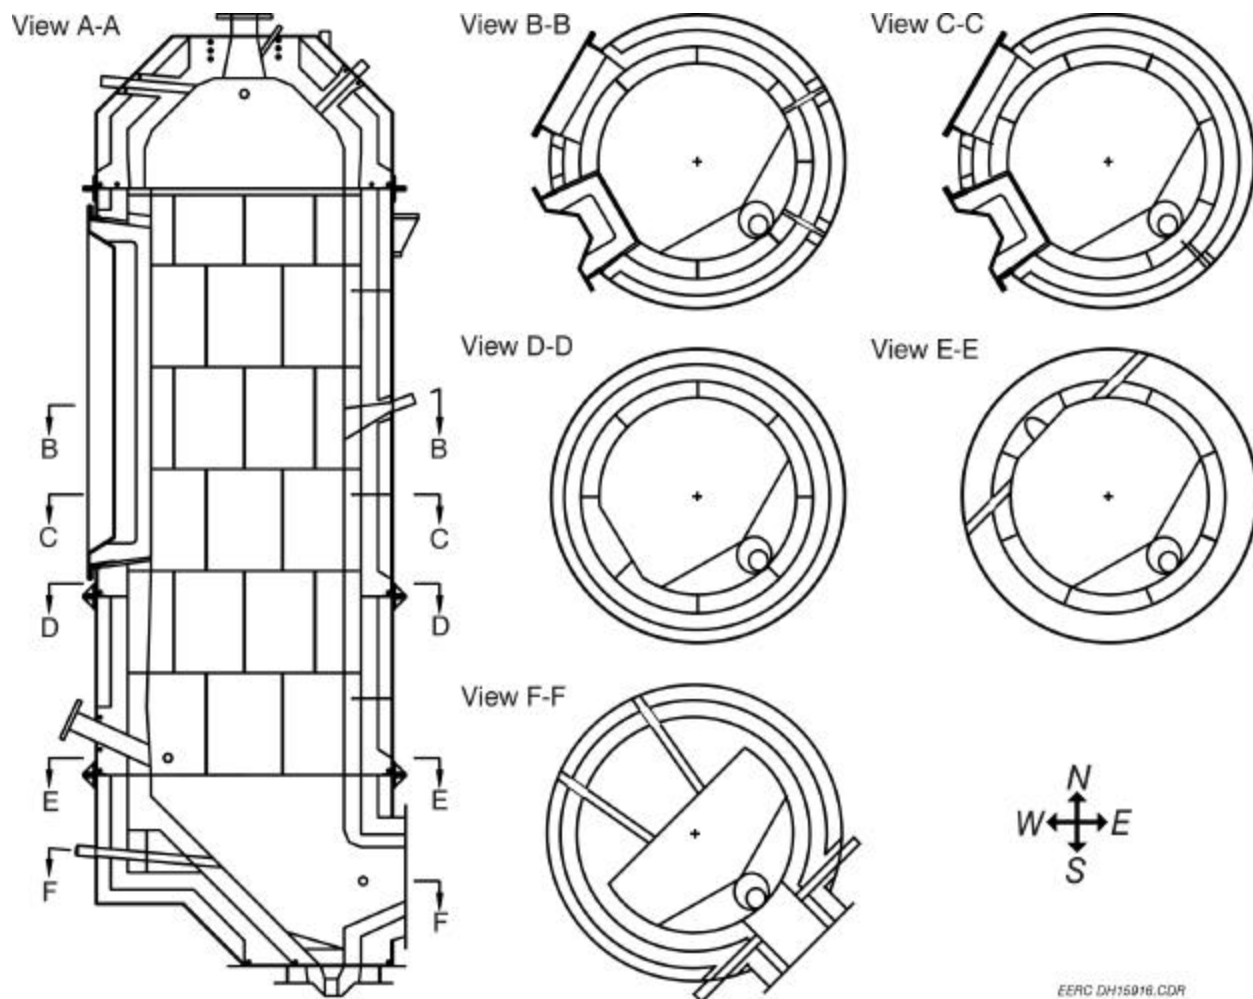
Cross-Sectional Views of Furnace Refractory Layout
